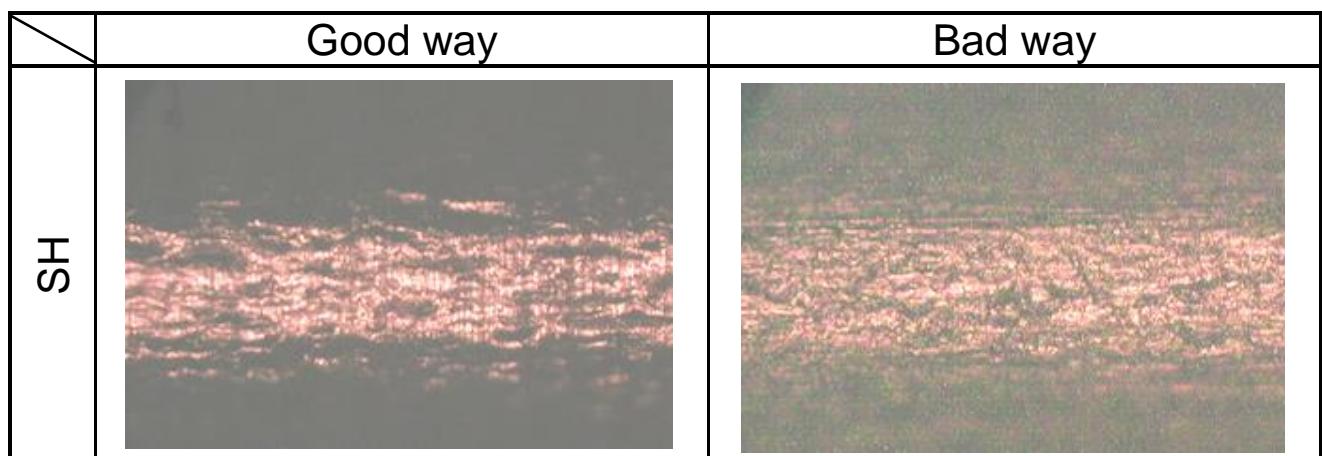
Surface appearance of 90 deg. W shaped bending test specimens
